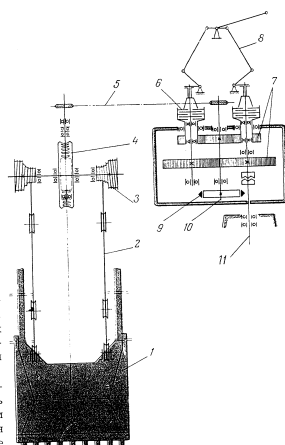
Kinematic scheme of the mechanism of the T-107 loader mounted on the C-80 tractor.
